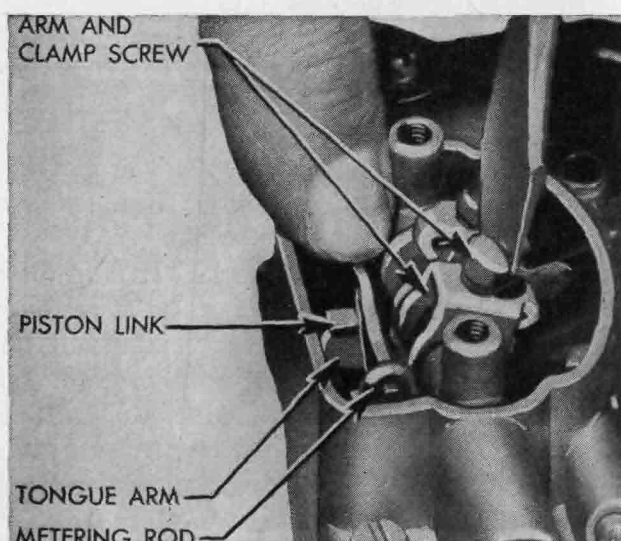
Adjusting metering rods. (Buick Motor Division of General Motors Corporation)
